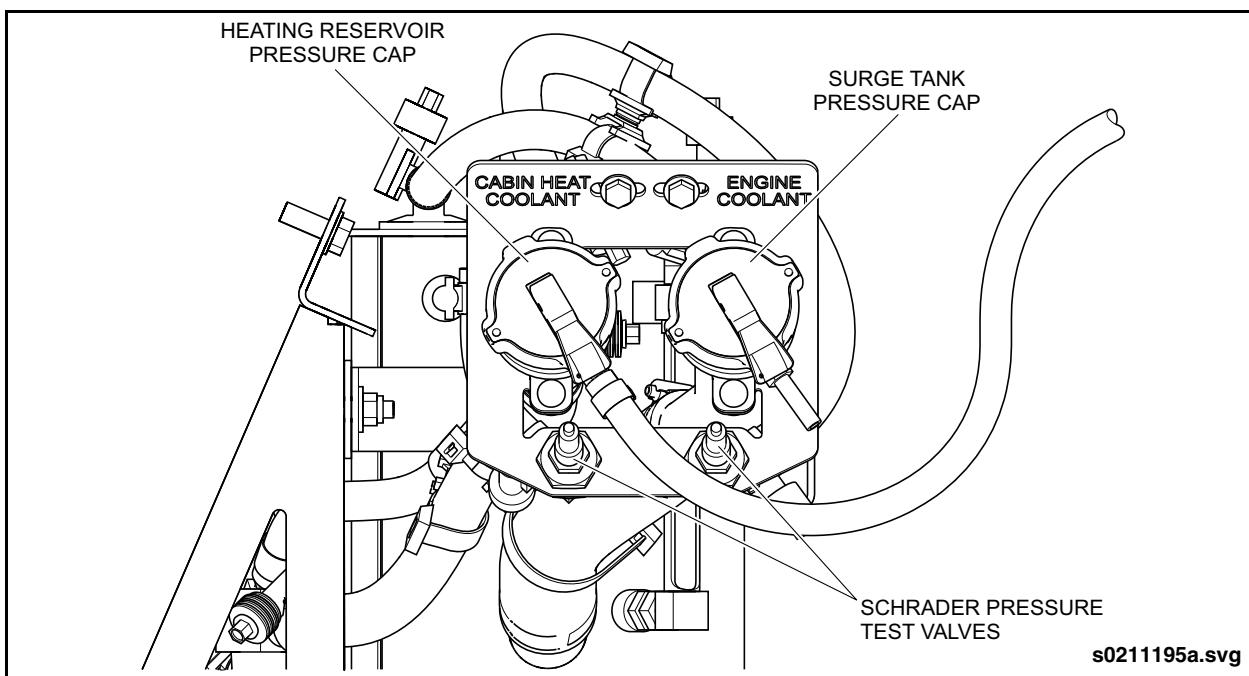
Surge Tank & Heating Reservoir Pressure Caps
